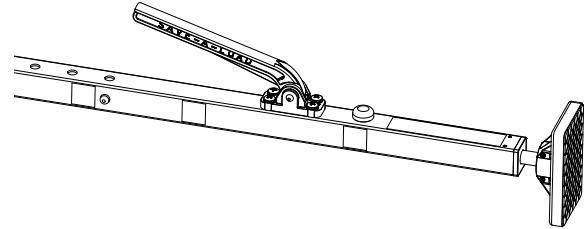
Extension tube: The end that can be adjusted with the silver snap button
